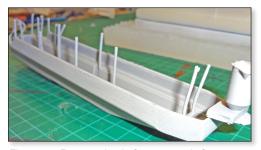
Raw casting before removal of gates and vents and secondary finishing.
